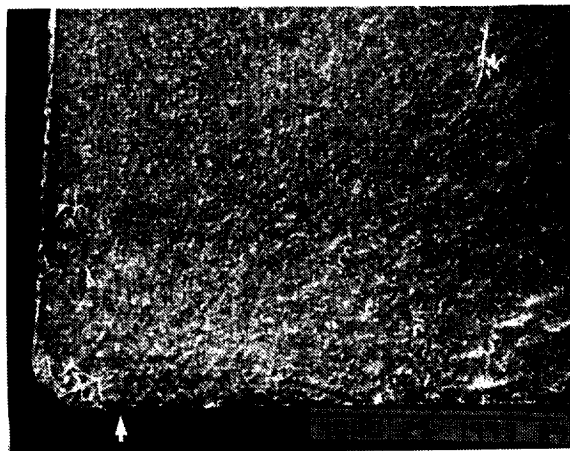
Typical fracture origin (surface flaw on heavily oxidized surface) found in CPS SRS201 sialon machined bars tested at 1370°C (2500°F).
